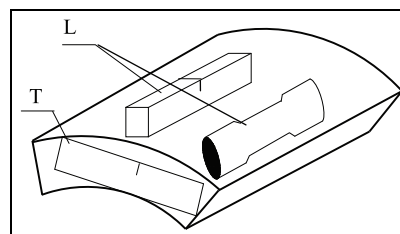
Scheme of cutting test specimens from a fragment of the pipeline.
